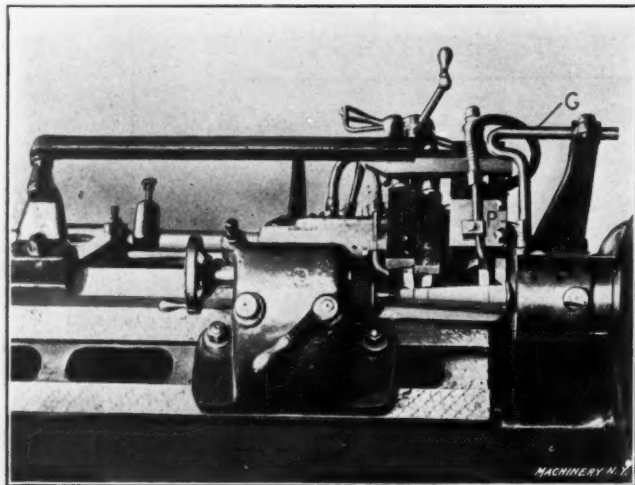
Lo-swing Lathe set up for Turning a Steering Knuckle
